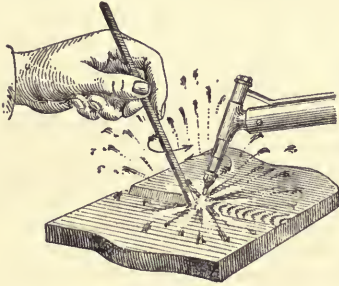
The welding rod is plunged into the molten bath and the white jet is played round it.
